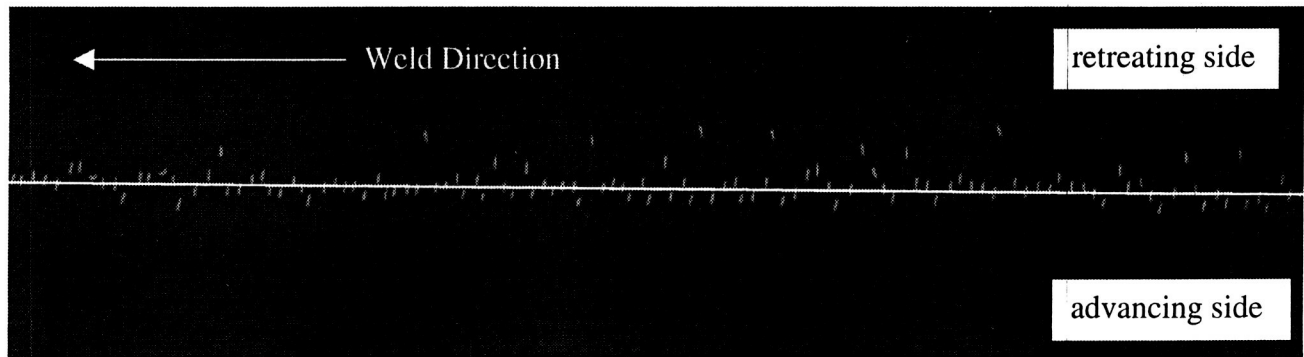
Plan-view radiograph of tungsten wire subjected to FSW with white line showing the location of the initial weld seam. Wire segments are a uniform 0.026-inches in length, and spaced 0.020 to 0.028-inches apart.
